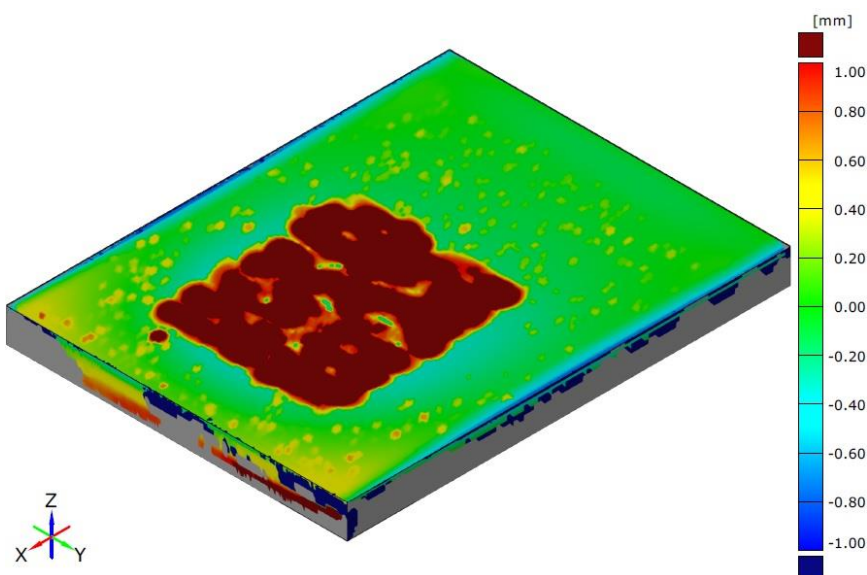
Scanned surface deposited with welding parameters of wire feed rate 2m/min and 21V
